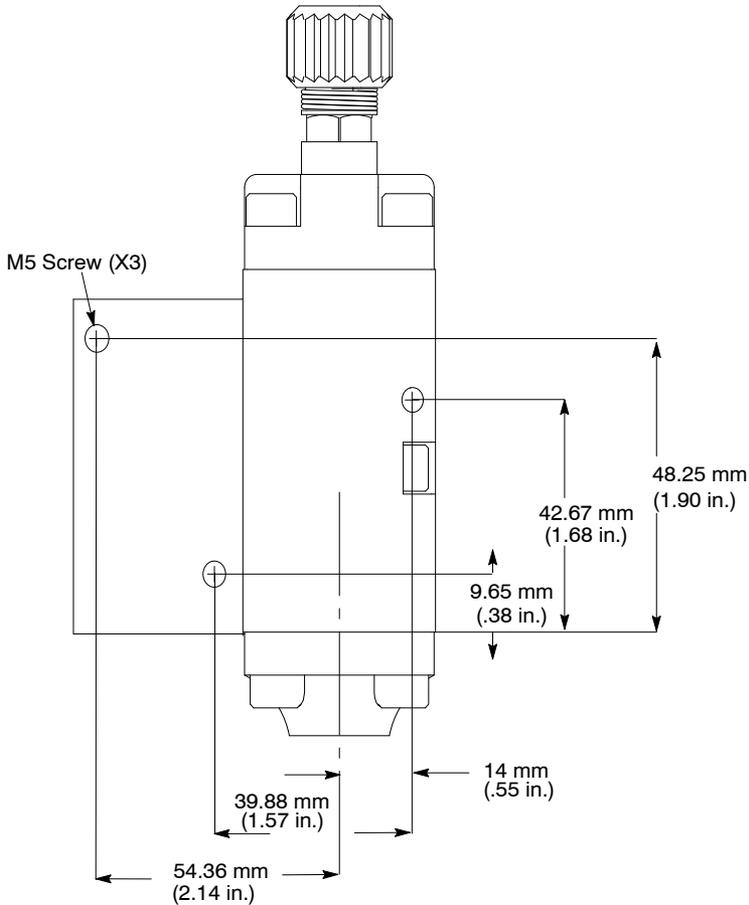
Mounting Dimensions for AG-900+/AG900+S Applicator with Adapter Block
